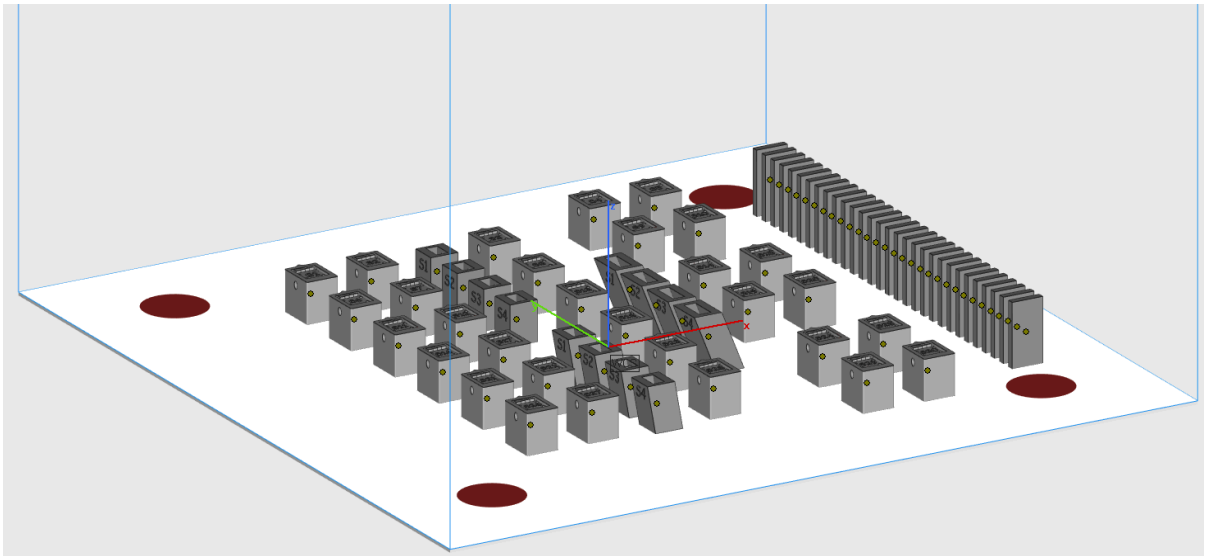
LB-PBF build plate layout for geometry (cube, vane), microstructural (cubes), and oxidation testing (panels)
